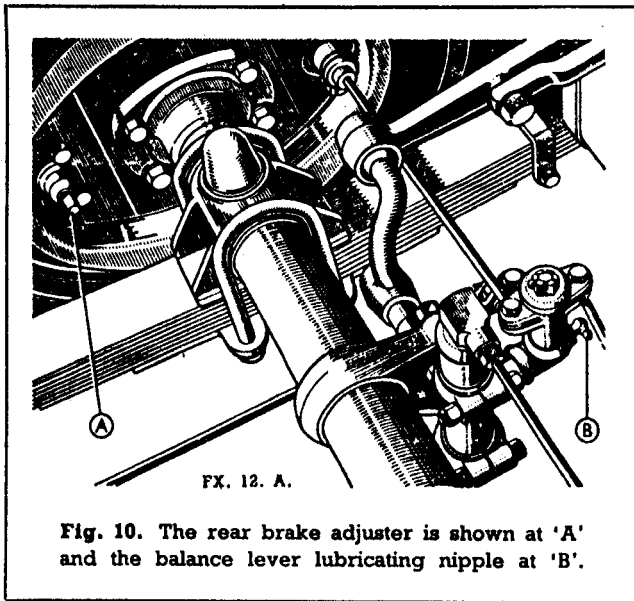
The rear brake adjuster is shown at 'A' and the balance lever lubricating nipple at 'B'.
